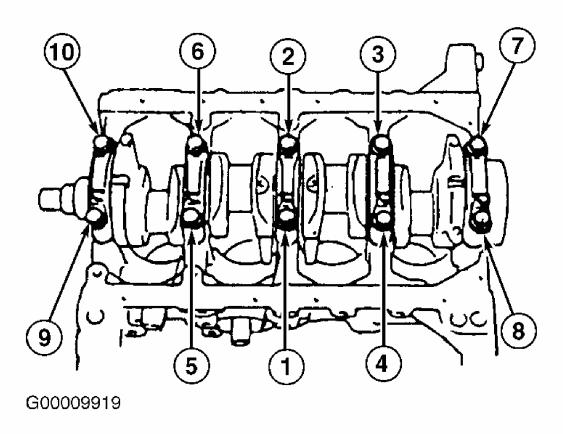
Main Bearing Cap Bolt Tightening Sequence Courtesy of MAZDA MOTOR CORP.
